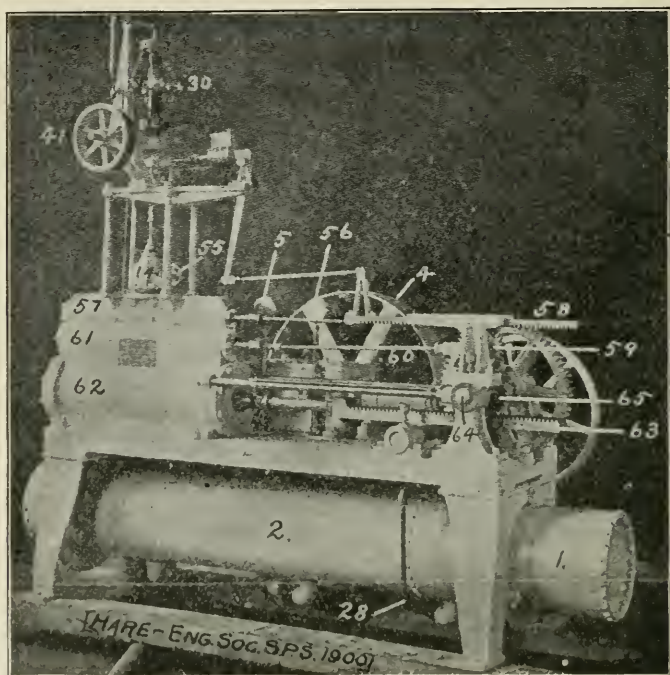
"Lombard." WATER WHEEL GOVERNOR (Side view).
